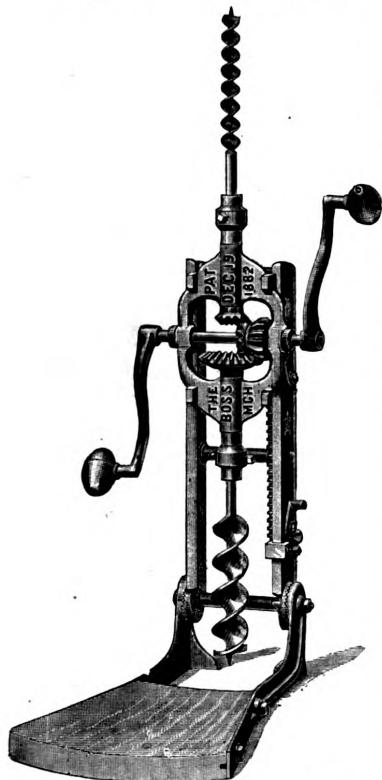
The Boss Two-Speed Boring Machine, Folded.
